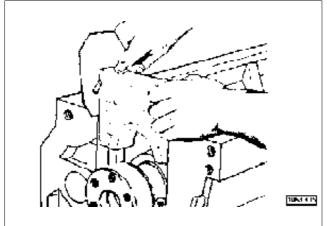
Install the gaskets in the front and rear main bearings; then fit bearings easing them into the engine block using sheet metal slides and tapping gently;
